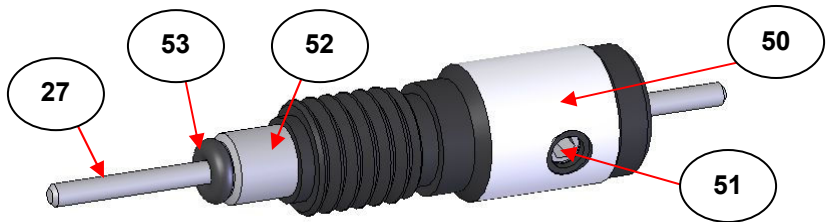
Screw Nut and Blanking Rod Fitting when removed from its Port Position on the VT Cell Accessory
